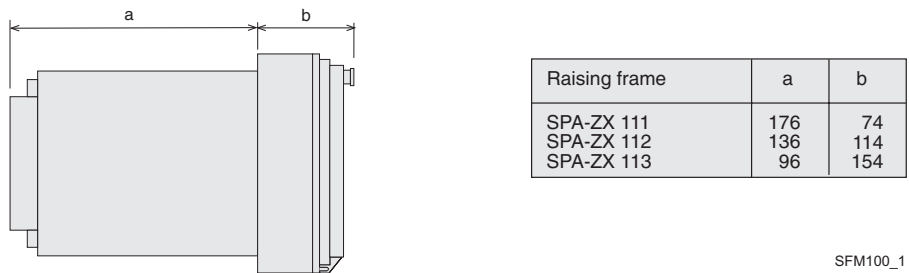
Semi-flush mounting relay case (dimensions in mm)
